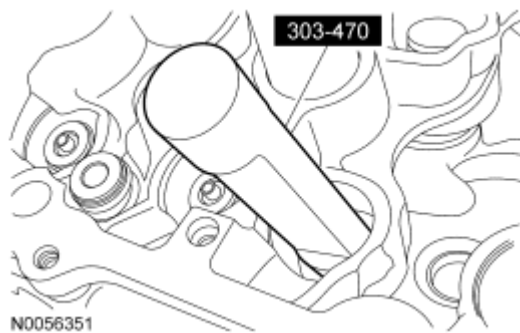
Installing New Valve Stem Seal Using Special Tool (303-470)
